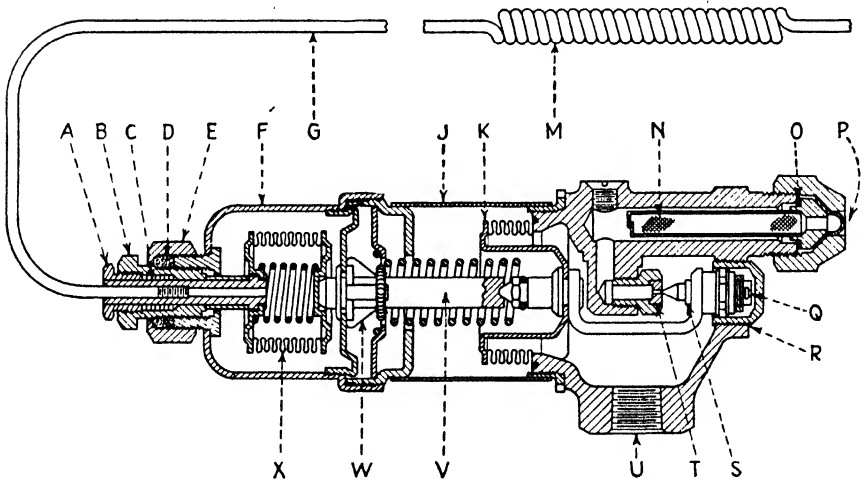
Mechanical arrangement of thermostatic expansion valve. (Detroit Lubricator Co.)
